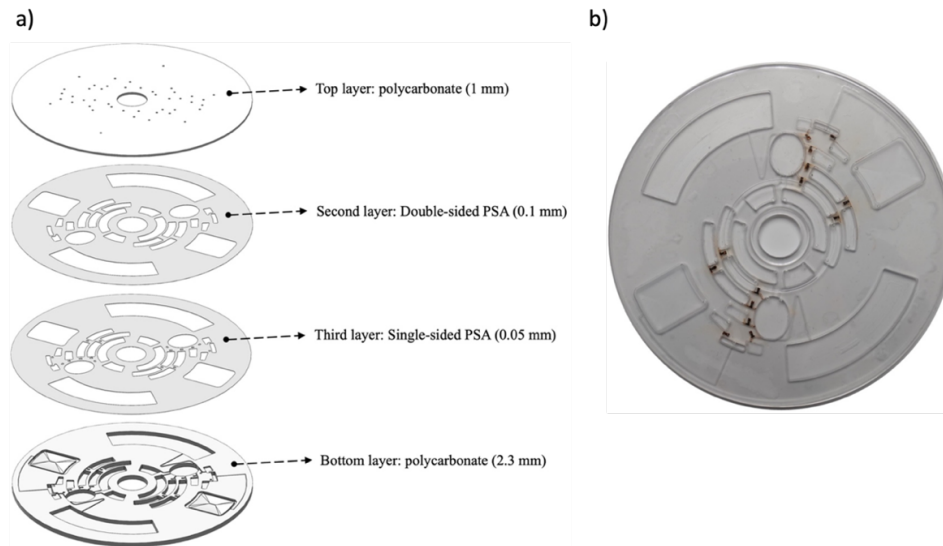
Centrifugal disc components. (a) Schematic illustrations of four main layers of CD assembly and (b) an image of actual fabricated and assembled CD.
